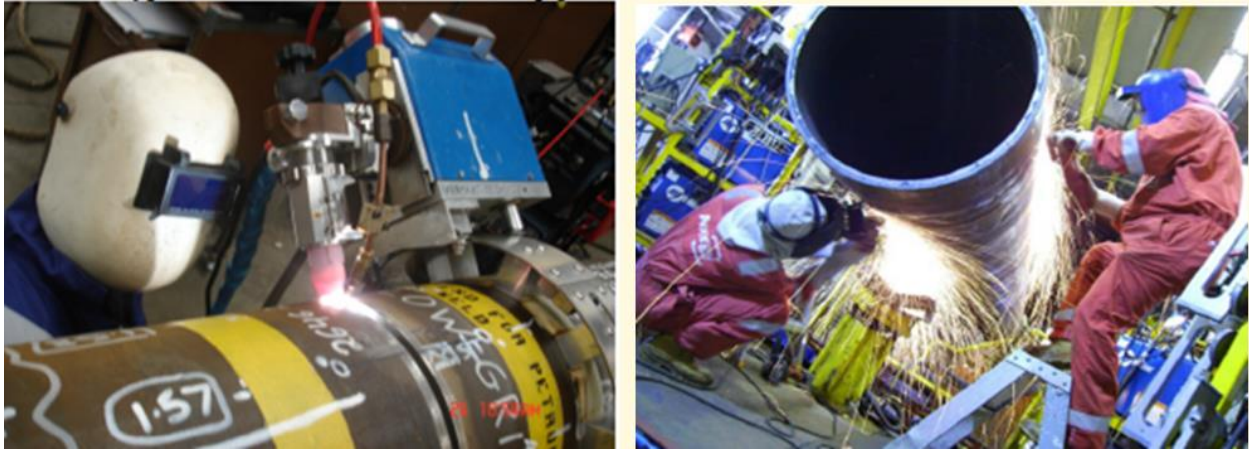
Mechanized PGTAW and grinding of weld cap to improve fatigue performance
